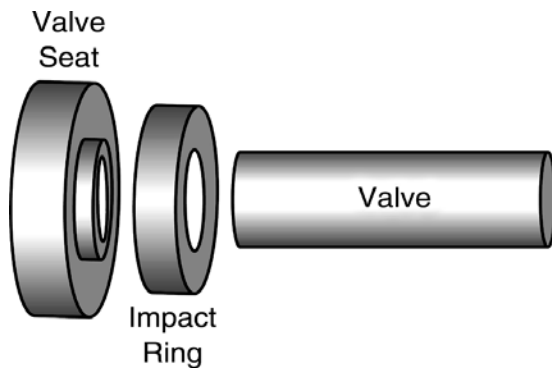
Standard homogenizing valve assembly (disassembled view).
